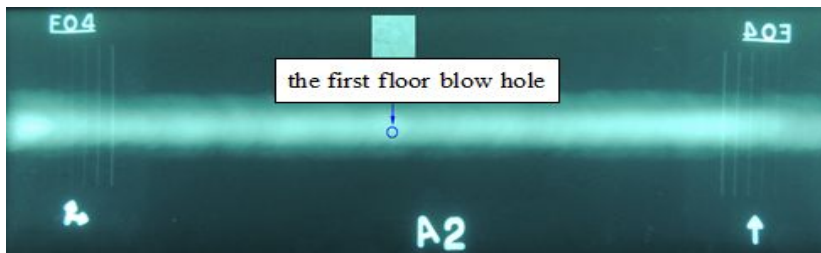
X-ray radiographic test film of shielding gas CO<sub>2</sub> 100% welding specimen by opening angle 50°
